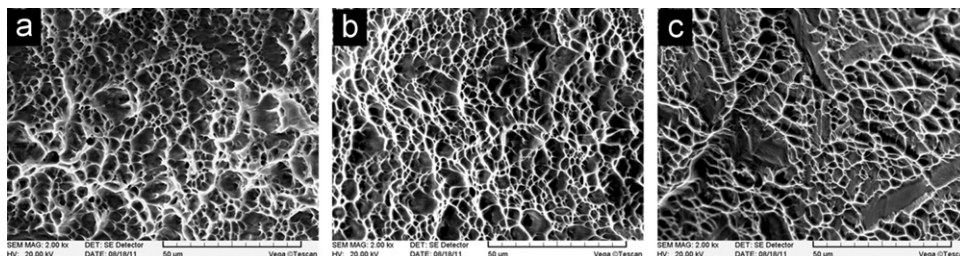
Morphologies of fracture surface of tensile specimens: (a) BM specimen, (b) LBW (broken in the BM), (c) TIG (broken in the FZ).
